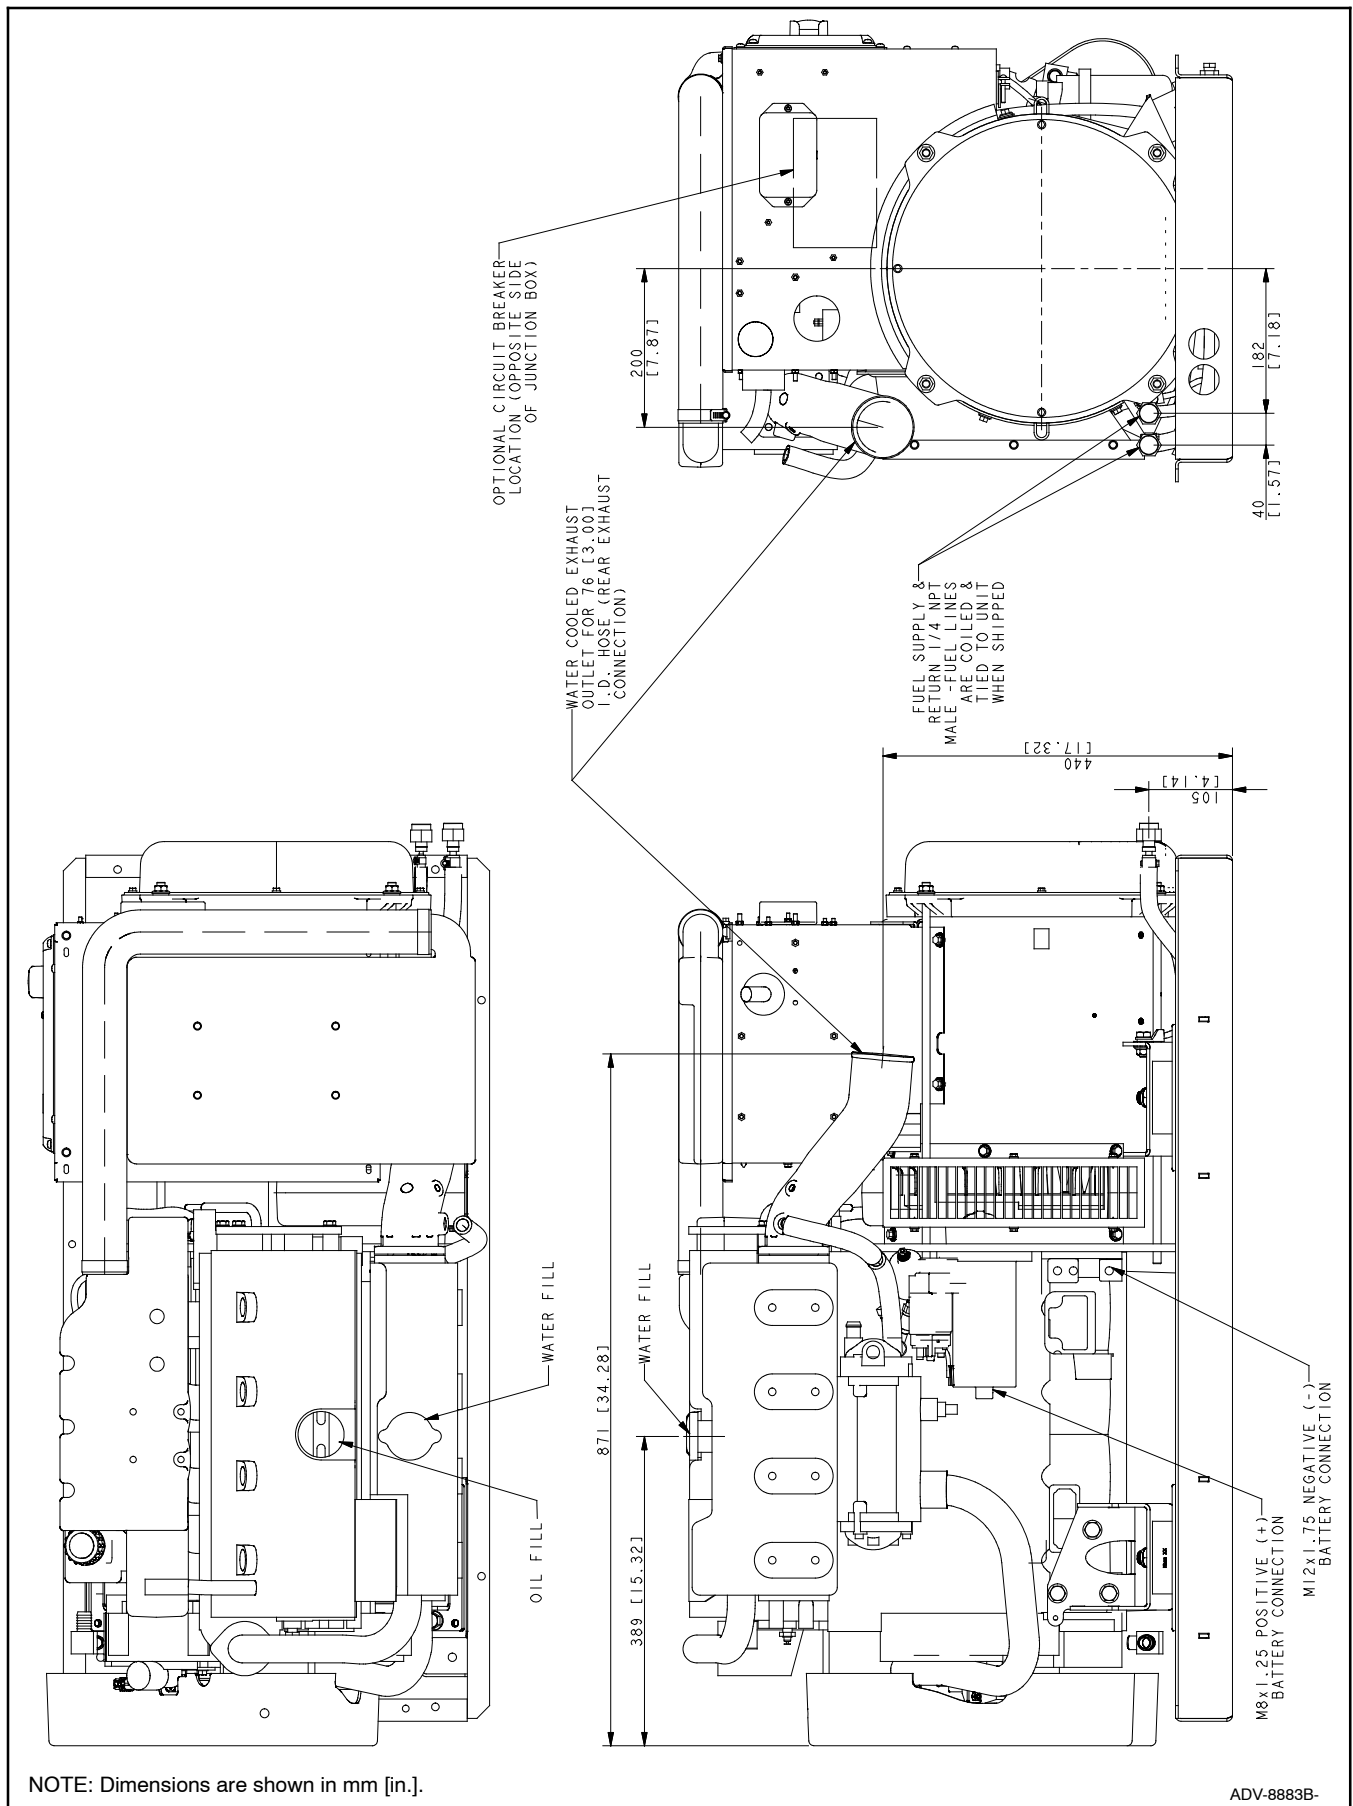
Dimension Drawing, 21-24EKOZD and 17-20.5EFKOZD (Sheet 2 of 2)
